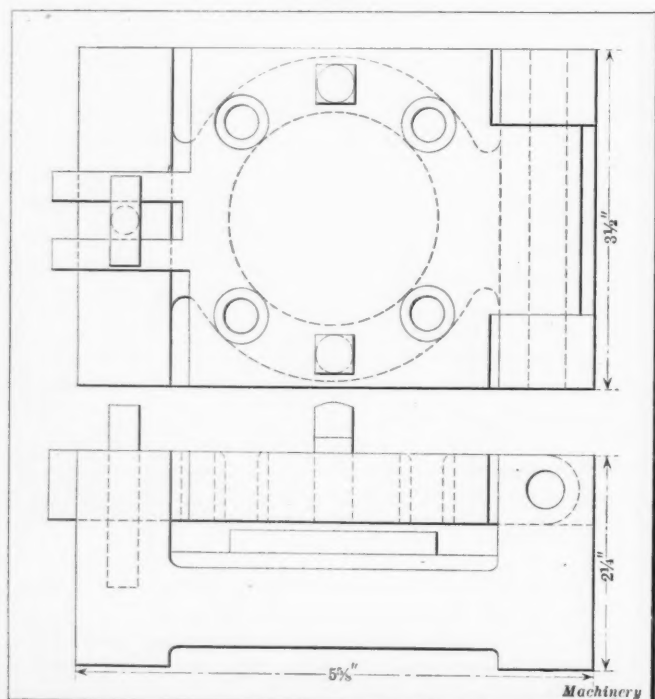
Uneconomical Design of Box Jig for drilling and reaming Four Holes in a Ring
